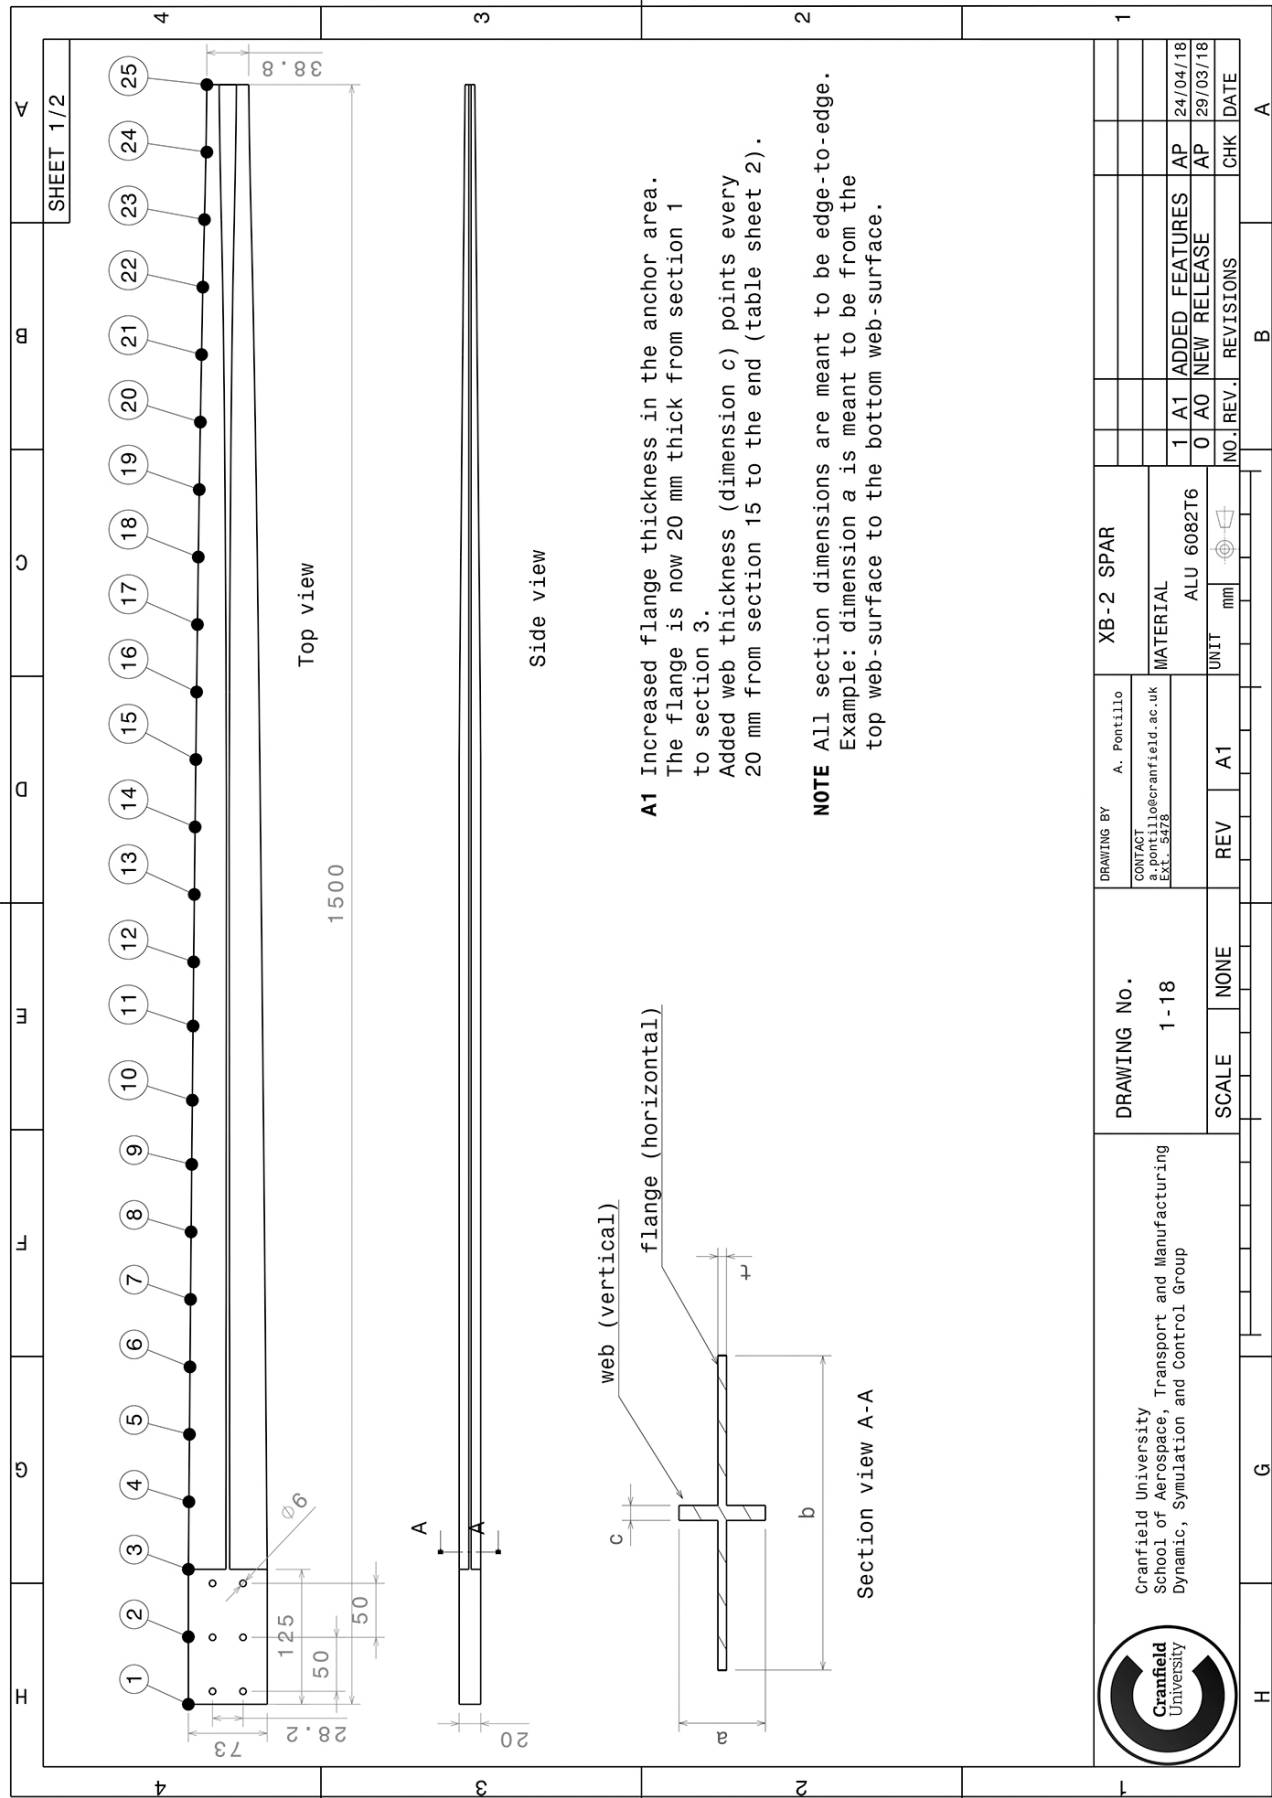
Manufacturing drawing of XB-2 spar. Sheet 1/2.
